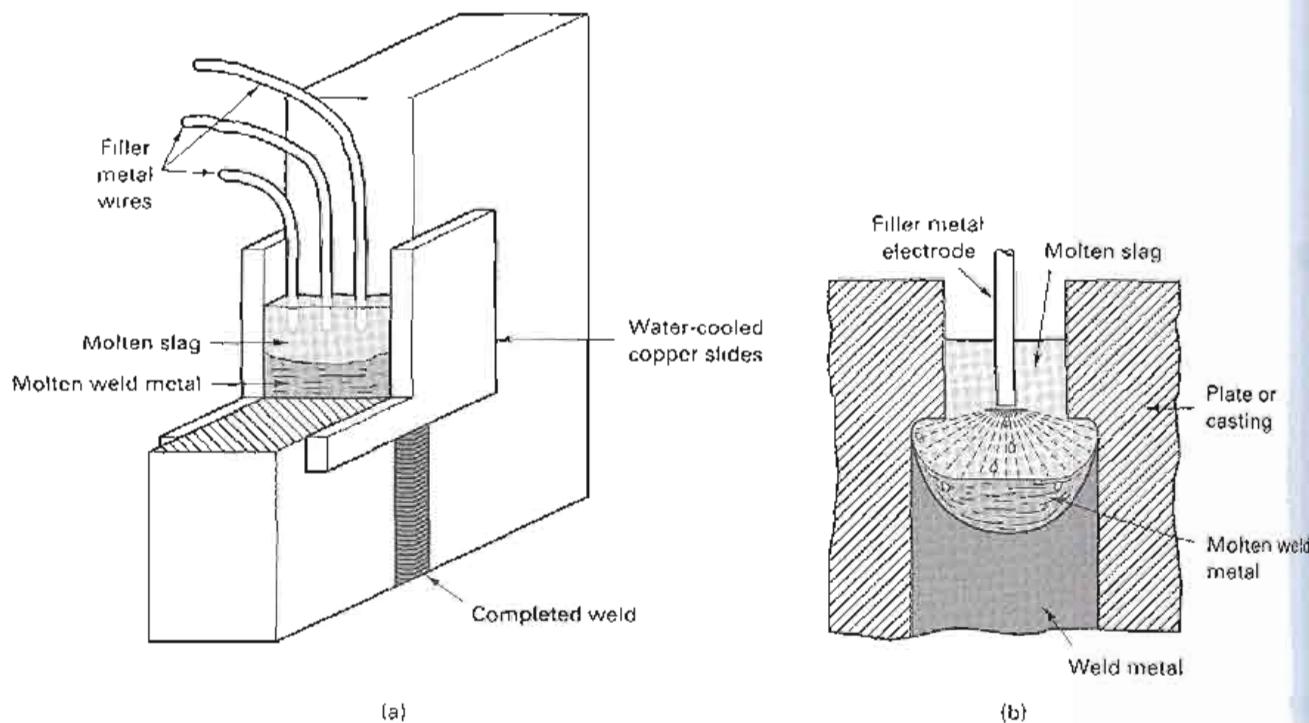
(a) Arrangement of equipment and workpieces for making a vertical weld by the electroslag process. (b) Cross section of an electroslag weld, looking through the water-cooled copper slide.
